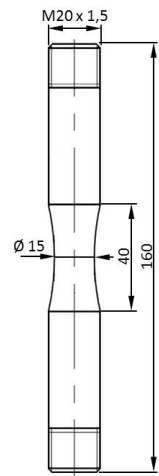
Tensile test specimen for the BETA 250-5 machine.
